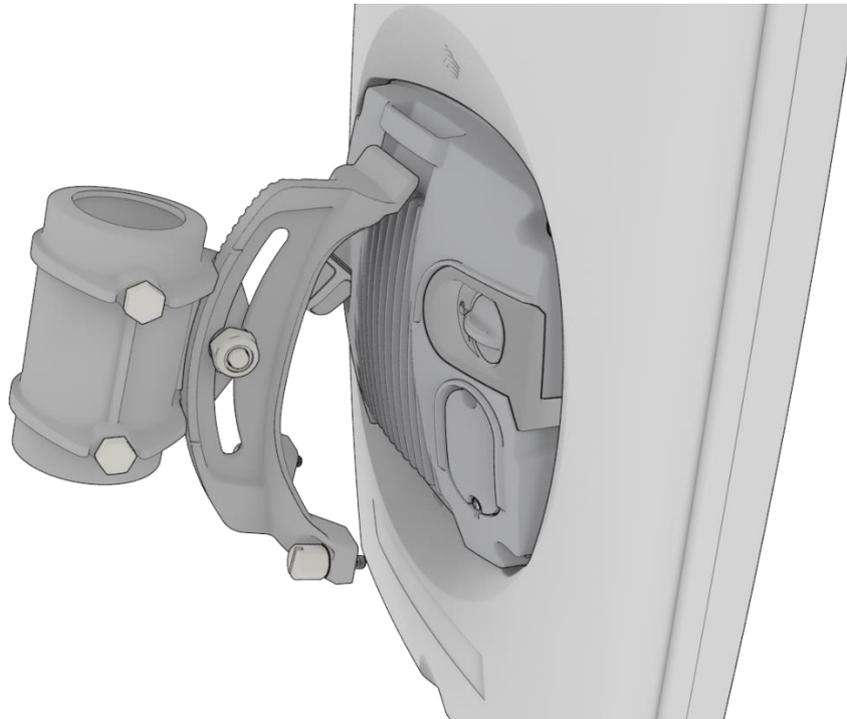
Attaching the mounting bracket to the Outdoor Wireless Antenna
